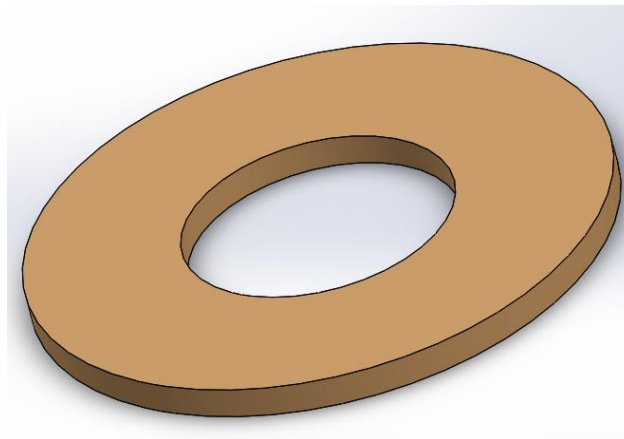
CAD model overview of the wireless charging transmitter coil.
